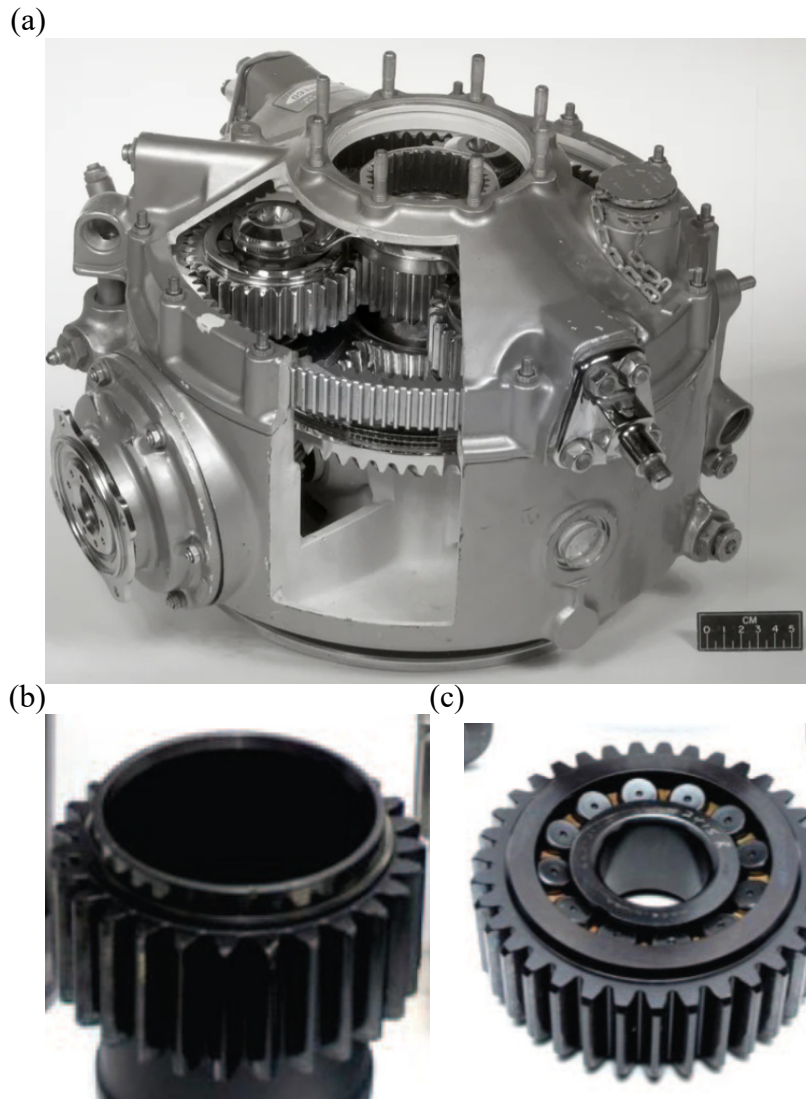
(a) The OH-58 rotorcraft transmission, which contains gears, shafts, bearings, and housing is shown in the image. A portion of the transmission housing has been removed to provide a detailed view of the internal components. This image is sourced from Ref. [2]. The rotating spur gears in the planetary stage of the OH-58 rotorcraft transmission: (b) sun and (c) planet gears. These images are taken from Ref. [3].
